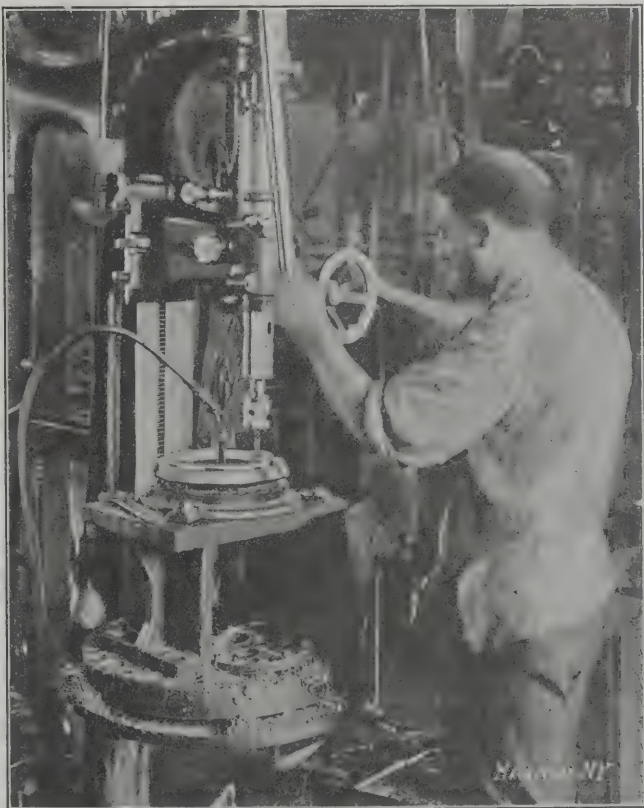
A Tapping Operation and Operator with a Remarkable Record—75,000 Blind 5-16-inch Holes in Chrome-nickel Steel without breaking a Tap
